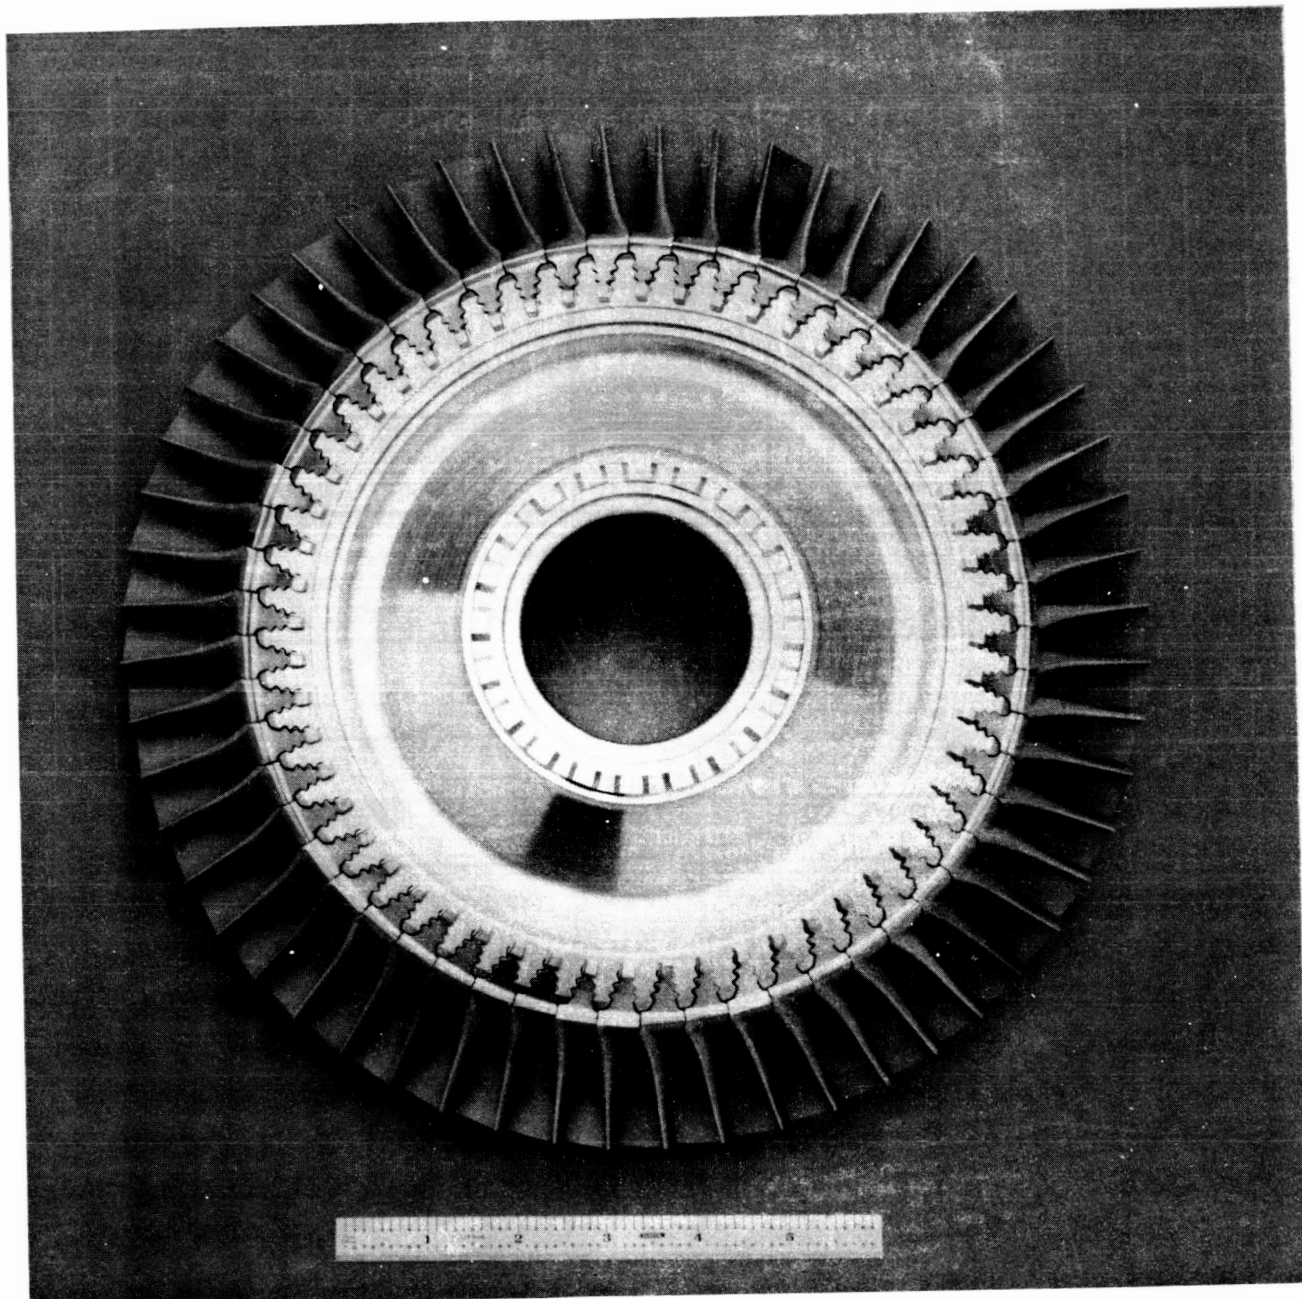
Assembled Interim Blades and Disk for High-Rotor-Rig Testing.
